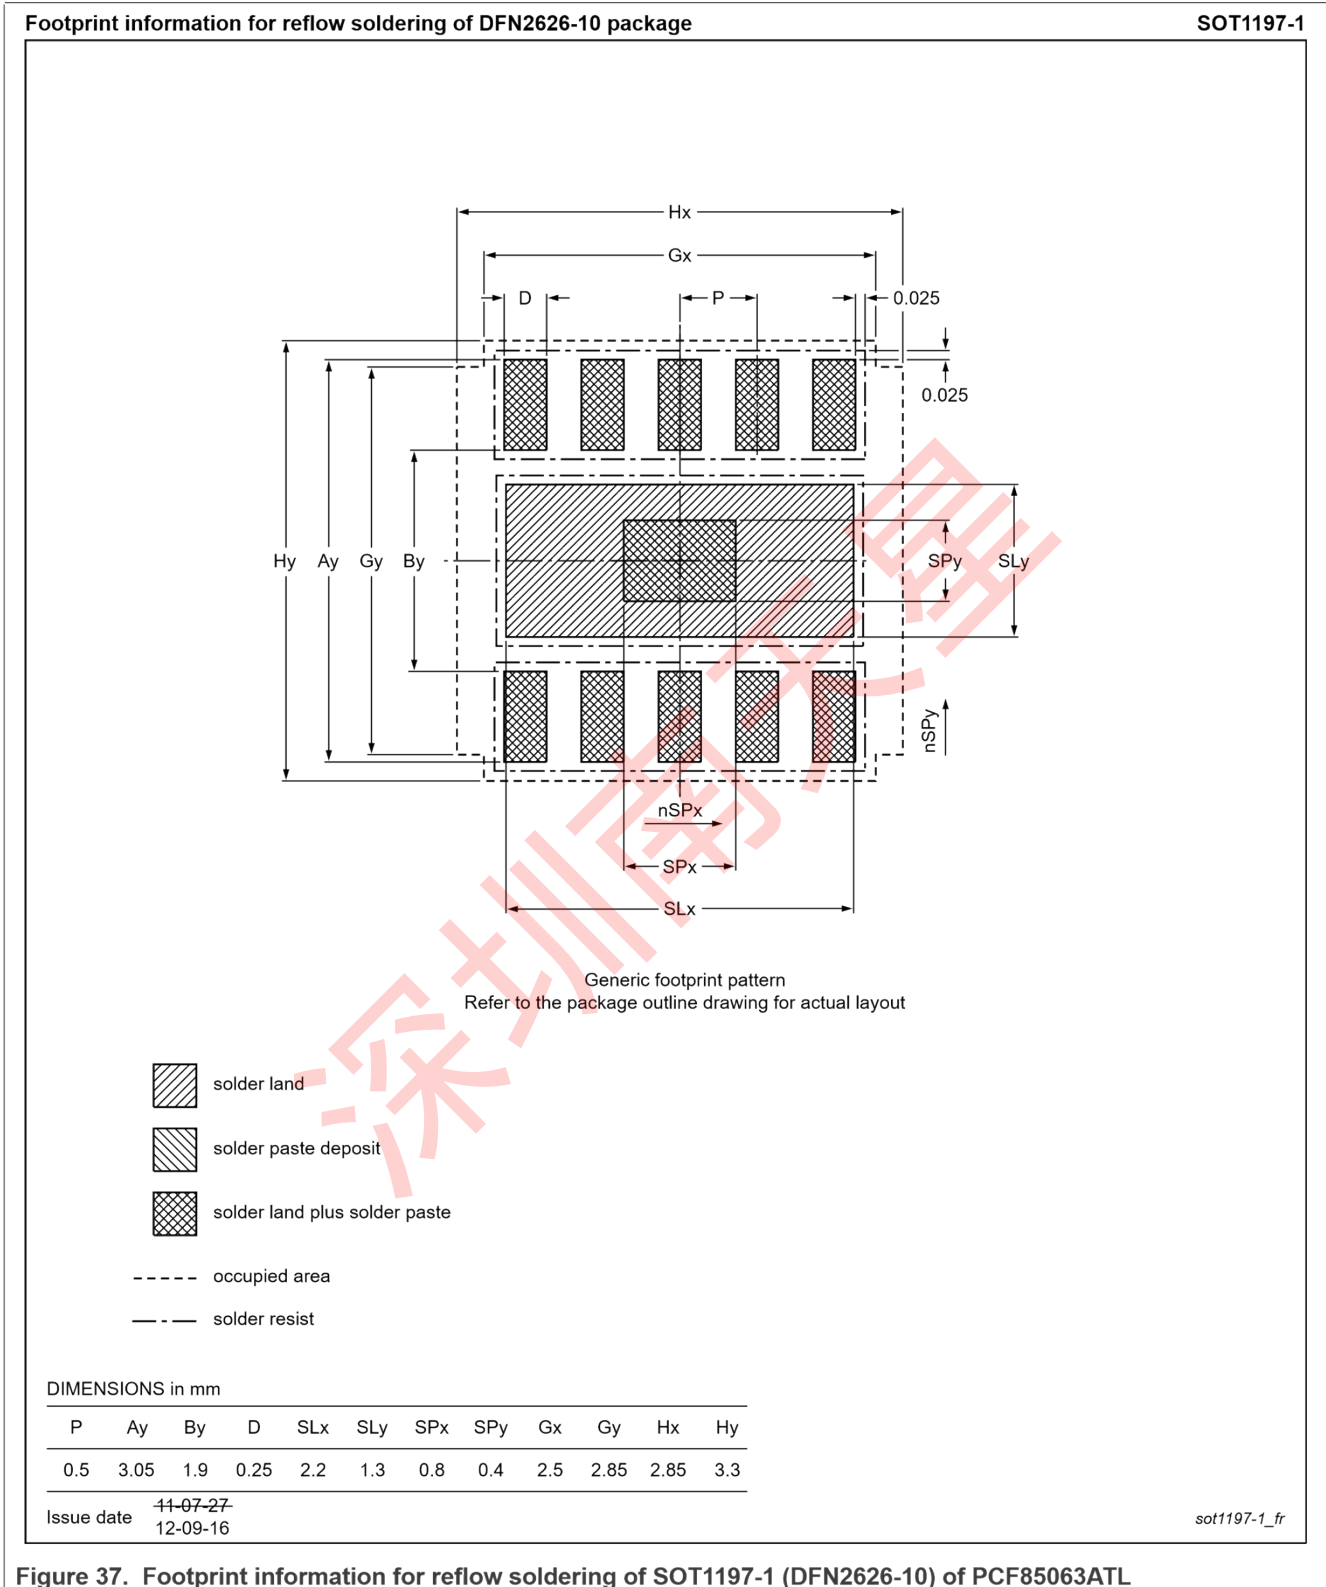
Footprint information for reflow soldering of SOT1197-1 (DFN2626-10) of PCF85063ATL
